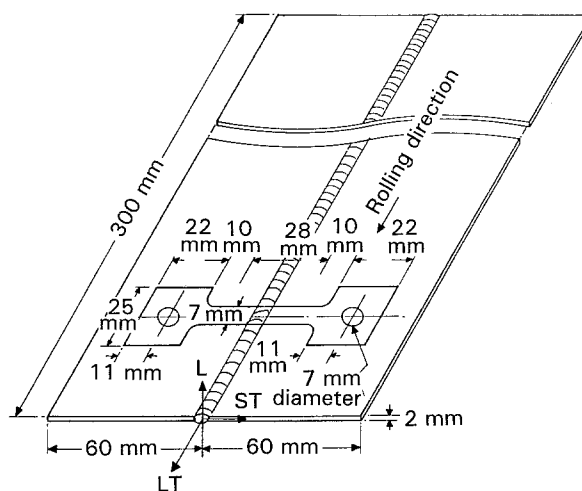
Schematic representation of a butt-welded joint showing the test region.
